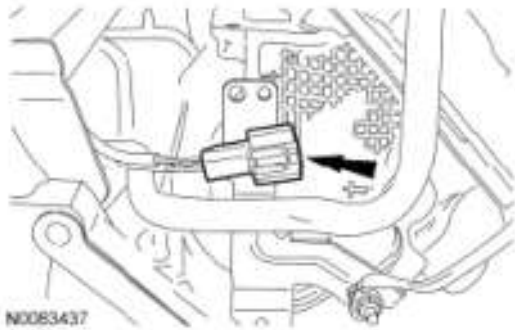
Locating Knock Sensor (KS) Electrical Connector
